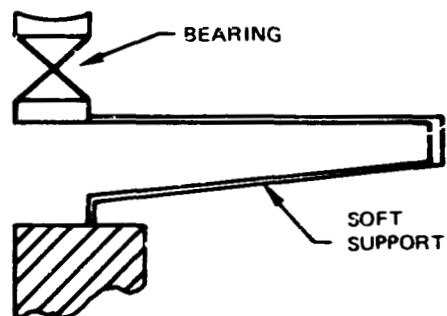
High Rotor Soft Front Spring Mount Configurations. Two options were considered in selecting mechanical spring.
